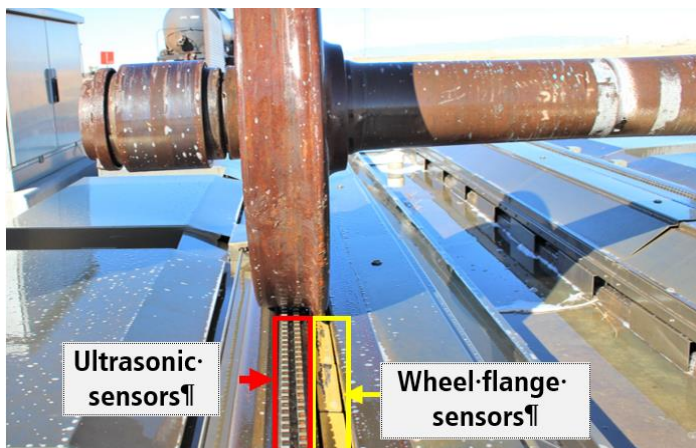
Wheel flange sensors and inboard ultrasonic probes in the wide gage section
